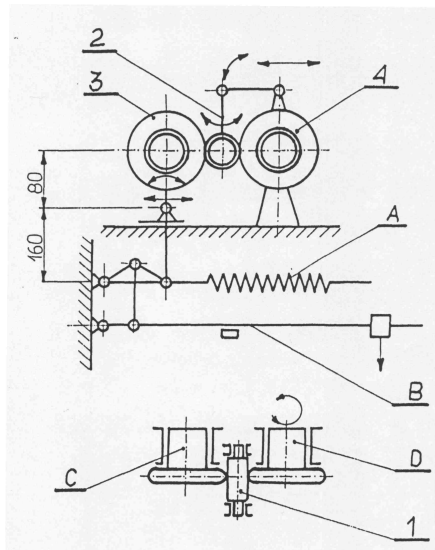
Diagram showing contact of specimen with rollers in tests of contact fatigue: 1 – tested specimen, 2 specimen suspension, 3 – press roller – driven, 4 – press roller – driving, A, B – loading mechanism, C, D – press roller housing
